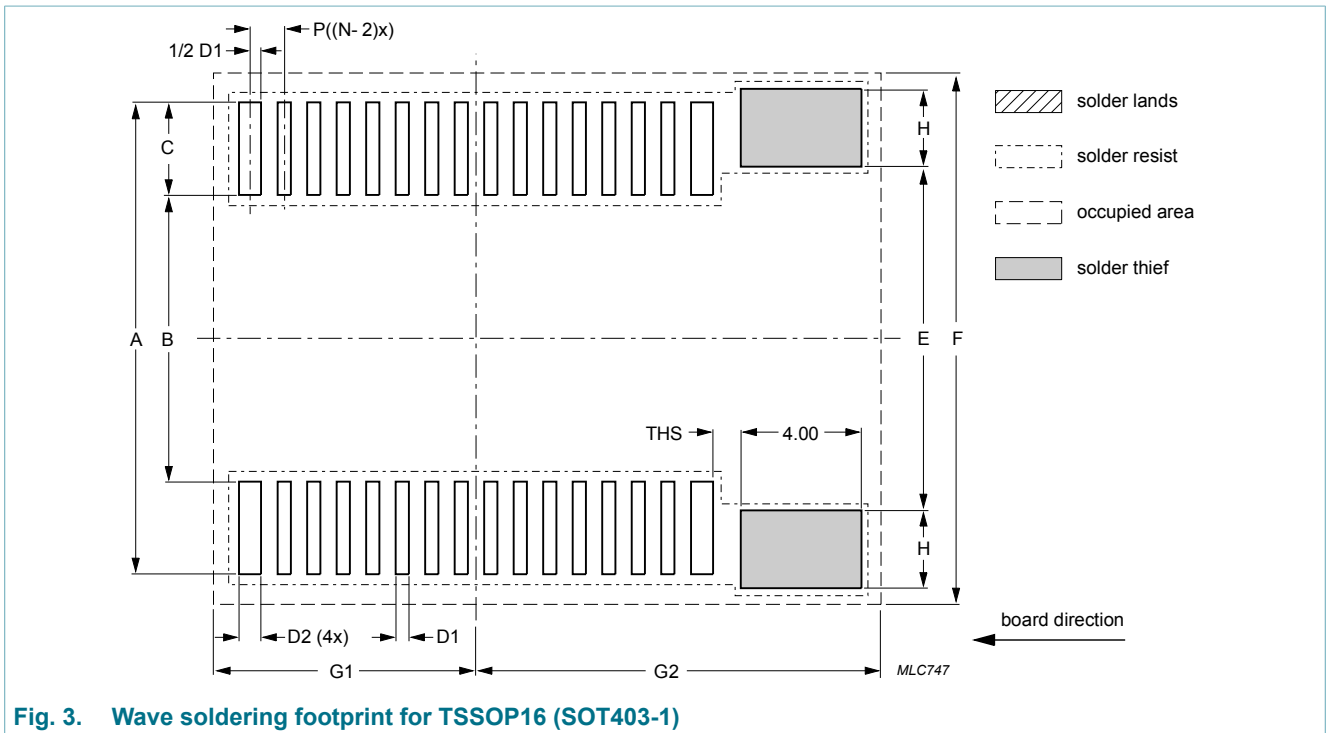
Wave soldering footprint for TSSOP16 (SOT403-1)
